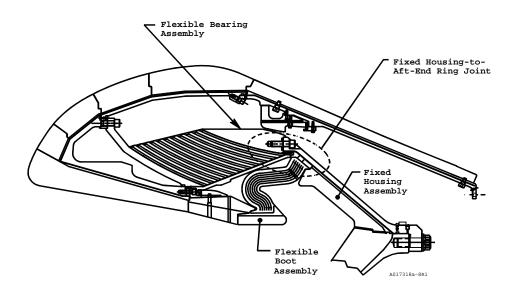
Fixed Housing-to-Aft End Ring Joint Location
